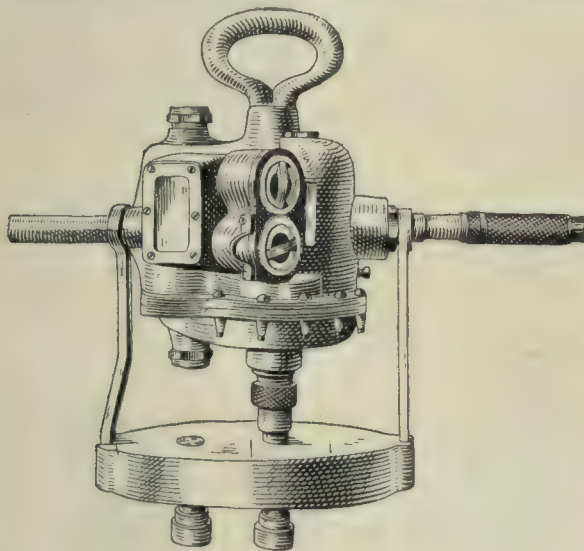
REDUCTION GEAR FOR AIR DRILL
